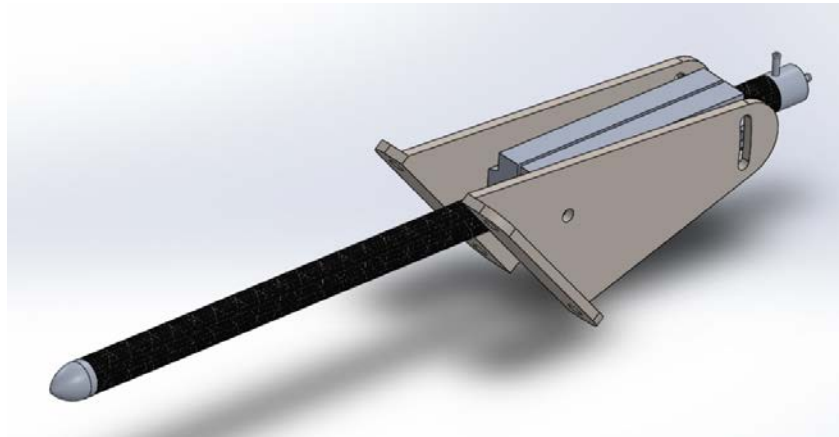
3D design of pitot probe and adjustable mounting bracket.
